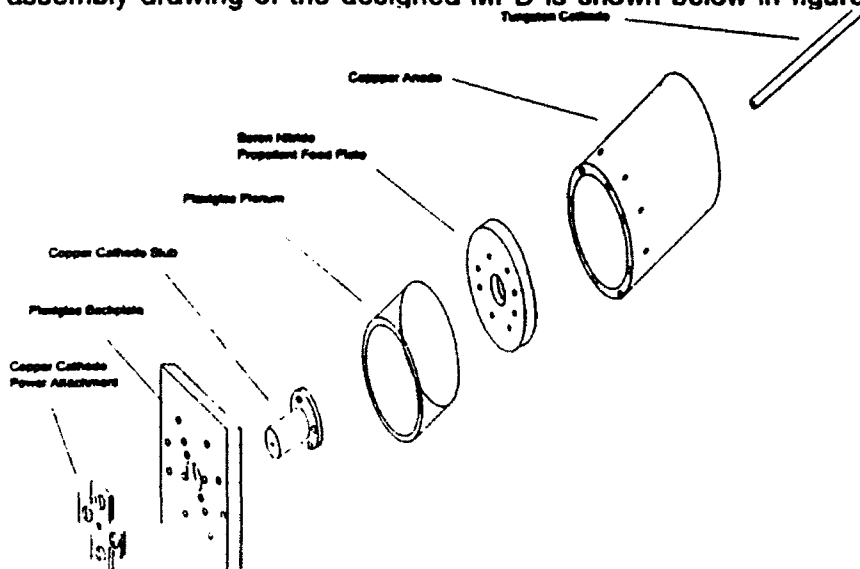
A Magnetoplasma-dynamic (MPD) Thruster Assembly Drawing
